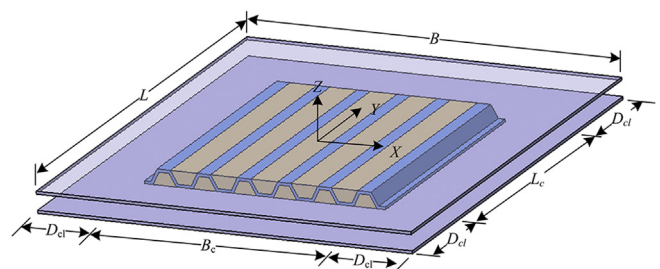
Schematic of the polymeric foam fully filled corrugated core sandwich panel.
